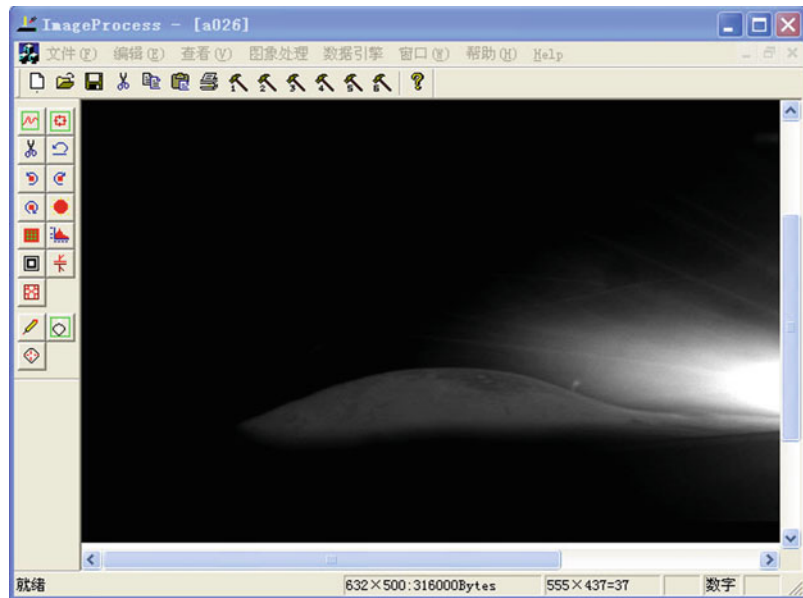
Side view image of weld pool in DE-GMAW
